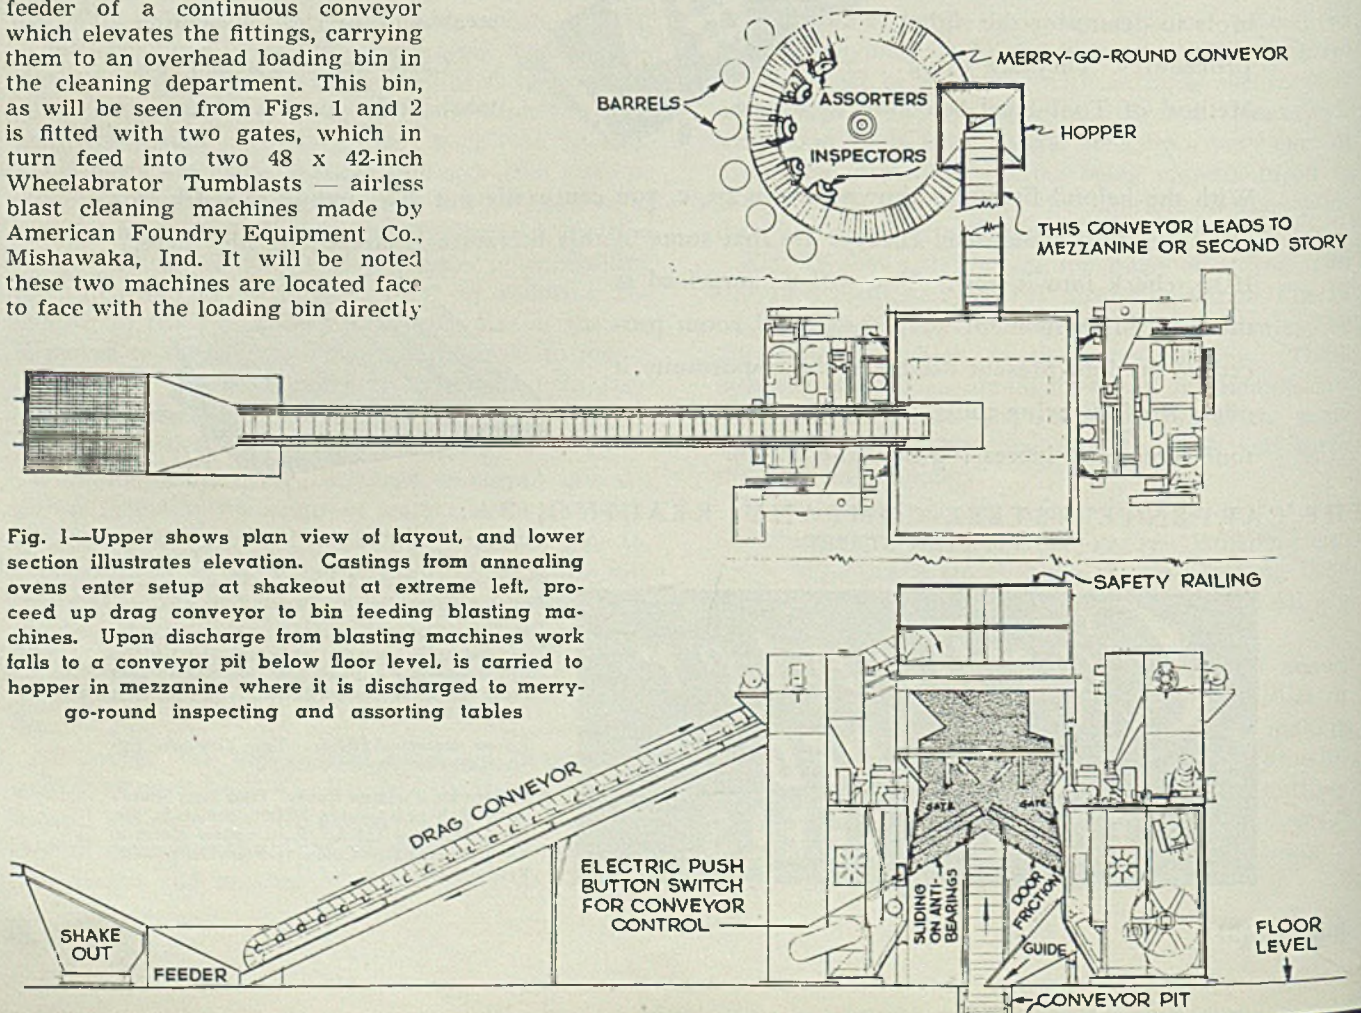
Upper shows plan view of layout, and lower section illustrates elevation. Castings from annealing ovens enter setup at shakeout at extreme left, proceed up drag conveyor to bin feeding blasting machines. Upon discharge from blasting machines work falls to a conveyor pit below floor level, is carried to hopper in mezzanine where it is discharged to merry-go-round inspecting and assorting tables
